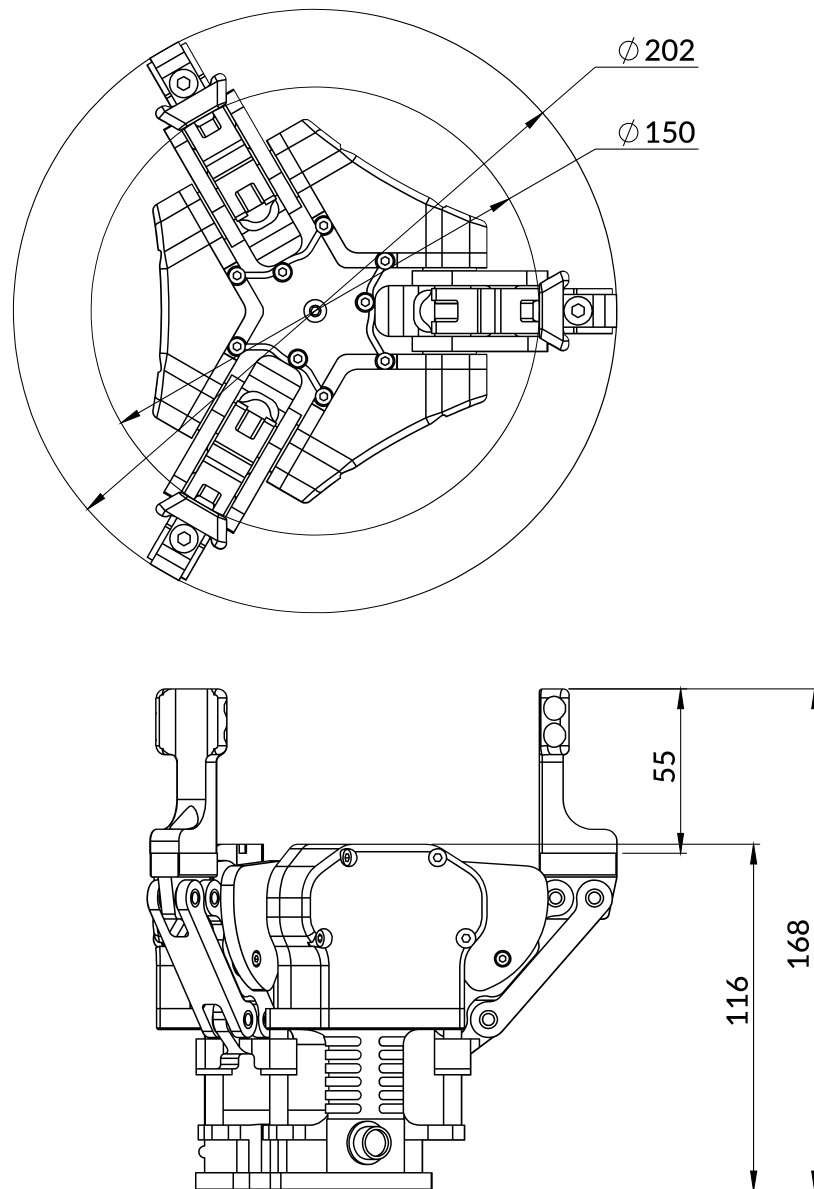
SusGrip 3F Mechanical Dimensions (Opening)
